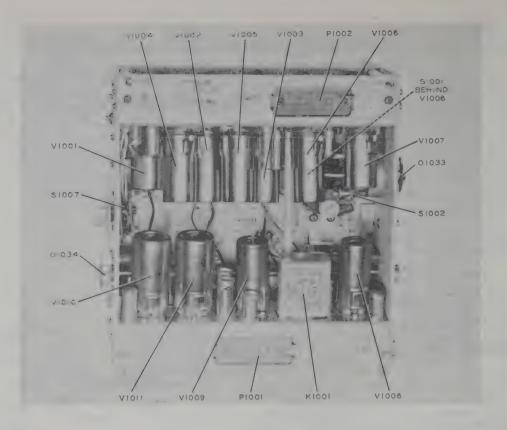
Tuner Subassembly, Bottom View, Switch and Tube Locations
